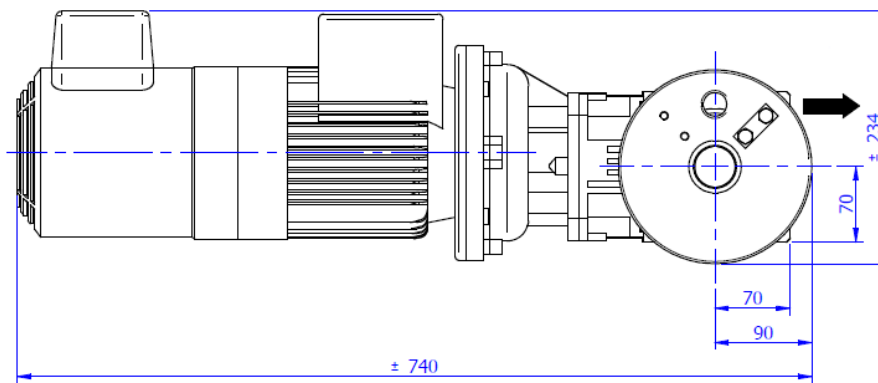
Side view of electric motor (source: EMCÉ WINCHES®)
